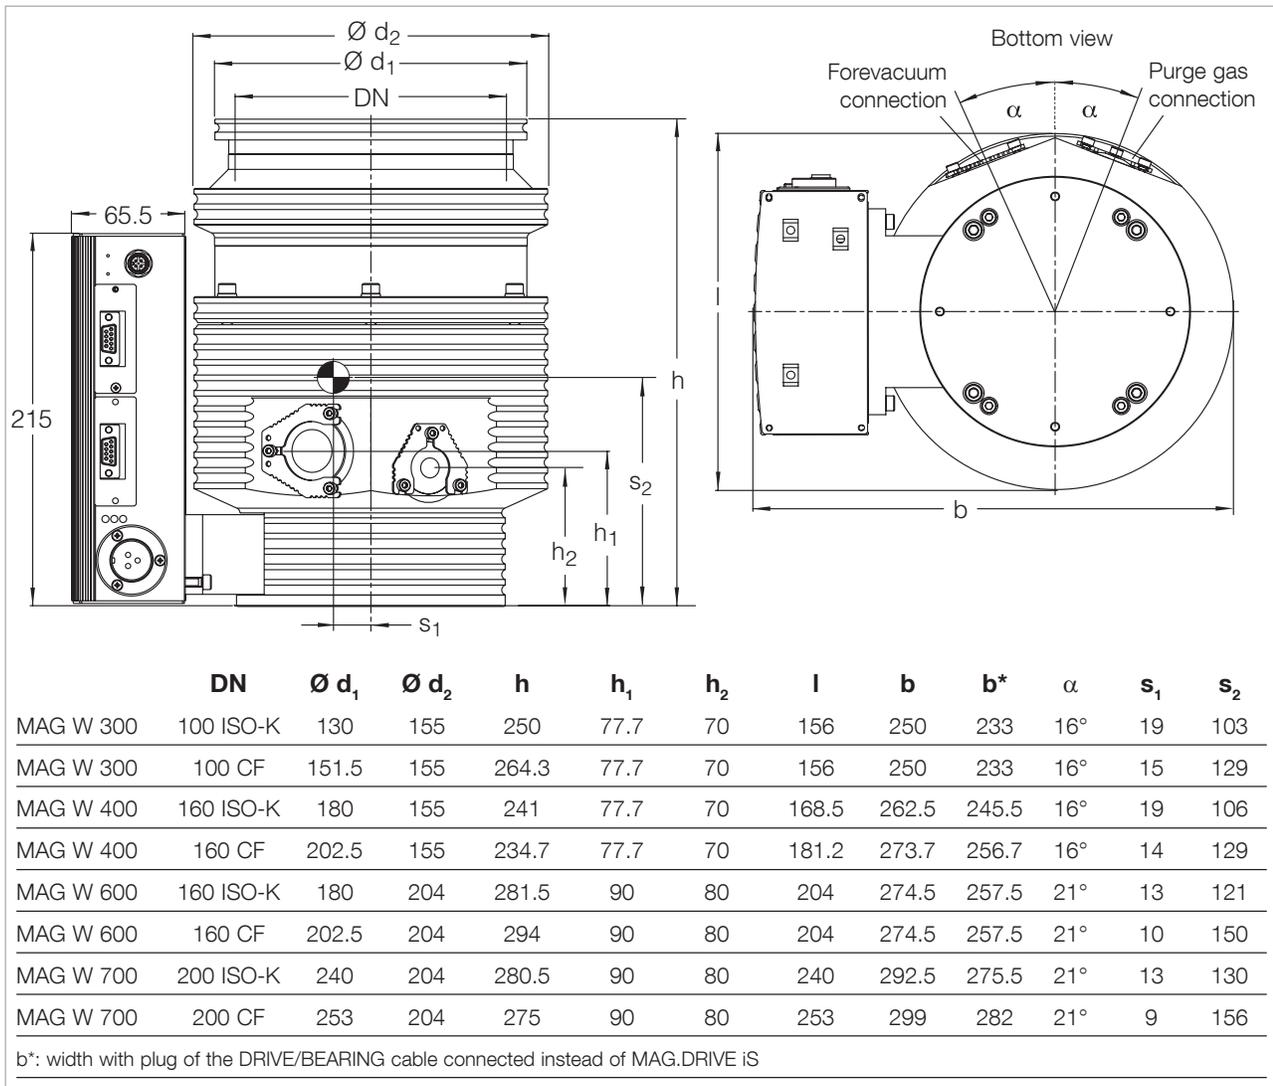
Dimensional drawing of the pumps, dimensions in mm
